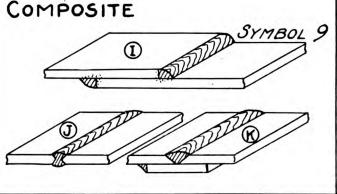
SINGLE-V DESIGN OF ELECTRIC WELD
